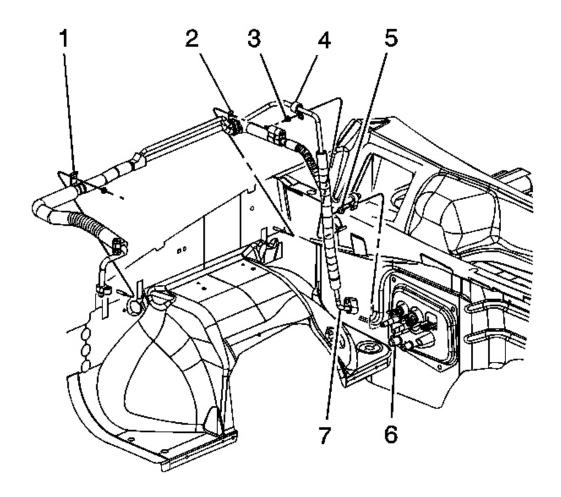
Removing/Installing Evaporator Tube (Long Wheel Base) Courtesy of GENERAL MOTORS CORP.
